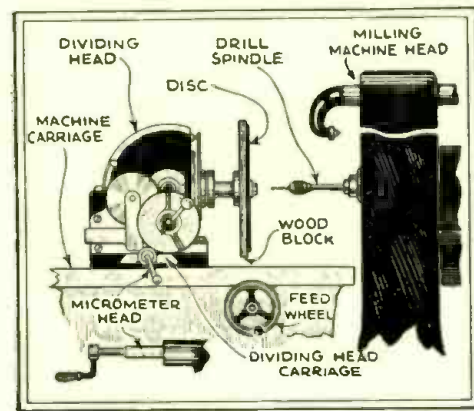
Shows how disc is mounted in Milling machine, if it is to be drilled in that fashion.
